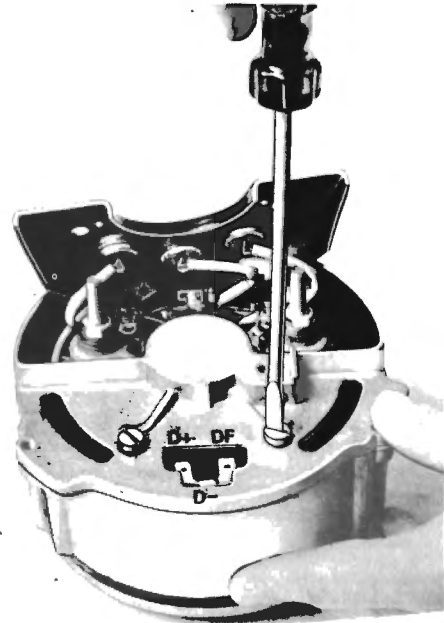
Releasing the brush holder retaining screws - Late type alt.
